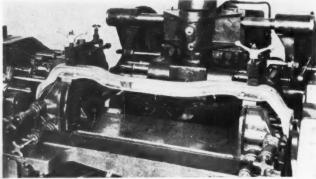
Close-up of the center section of the LeMaire Special Machine showing an axle in place.
